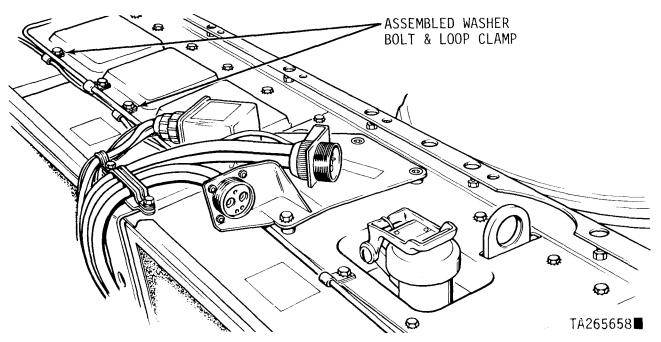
Removing or installing smoke generating system electrical lead,
